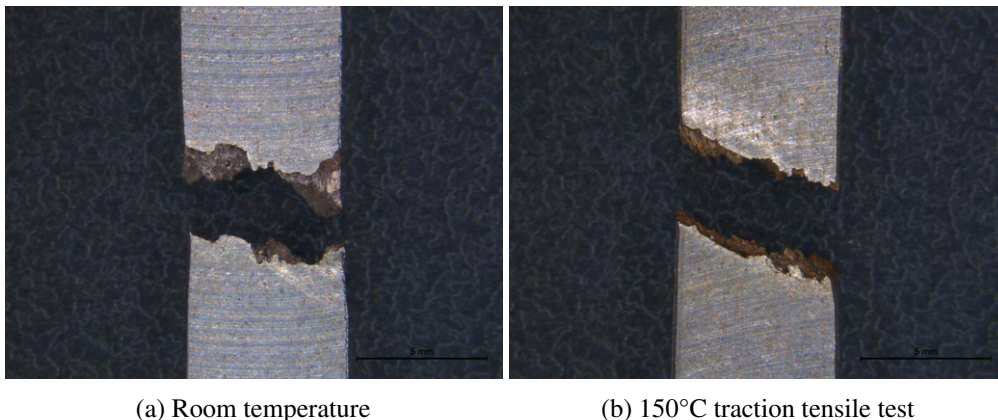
Optic images of the tensile traction fracture surfaces - part A
